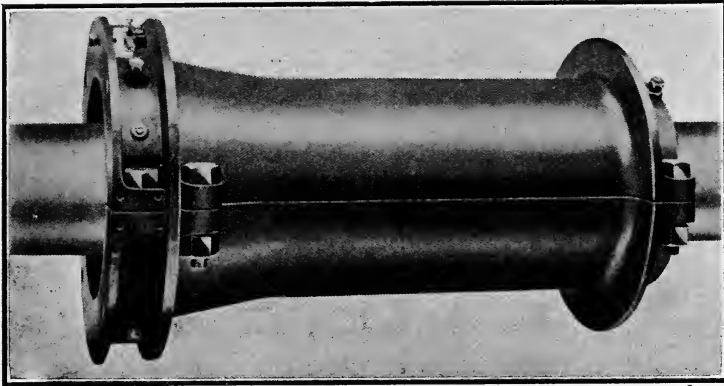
Torsionmeter Mounted Complete on Shaft.
